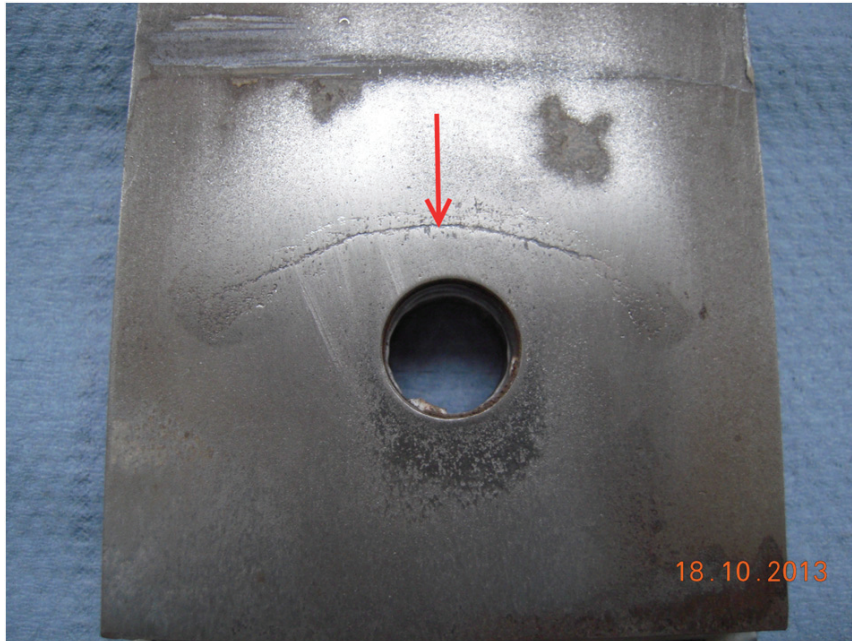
Fracture interface of the main plate under the small bolt after removal of fretting debris. (For details of specimen geometry, see Fig. 6). A notch has been formed at the edge of compressive contact due to fretting.
